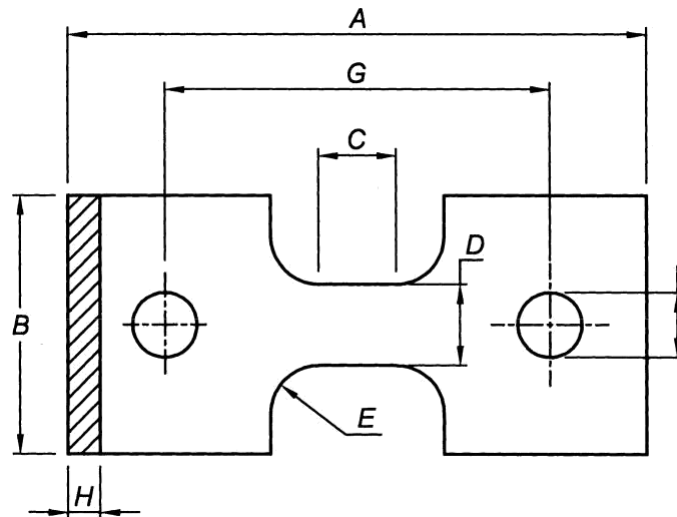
MACHINE TYPE B TENSILE TEST PIECE (FOR $E \geq 25$ mm)
